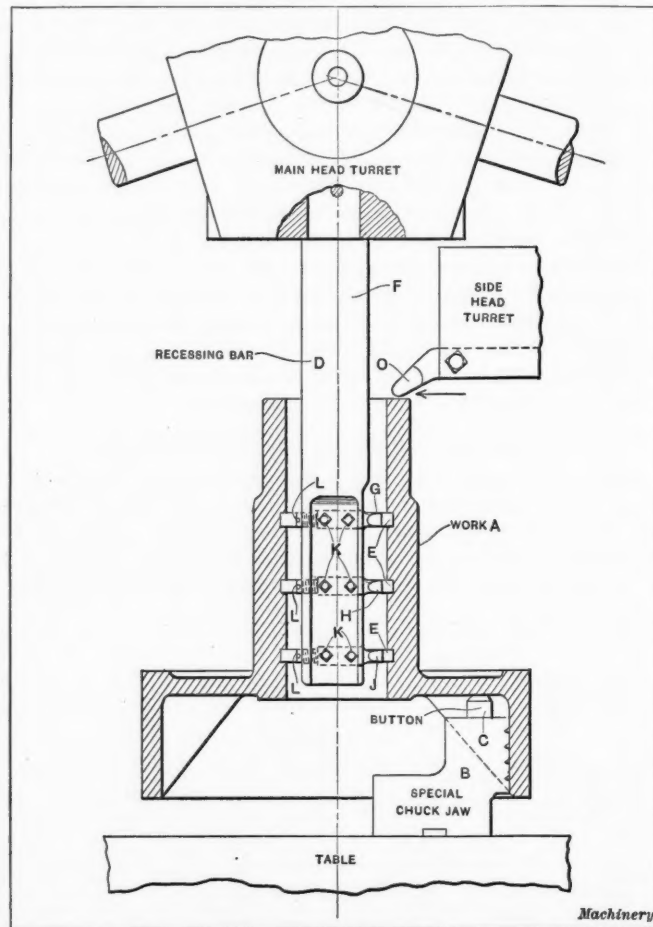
A Multiple Recessing Tool used in a Vertical Turret Lathe
